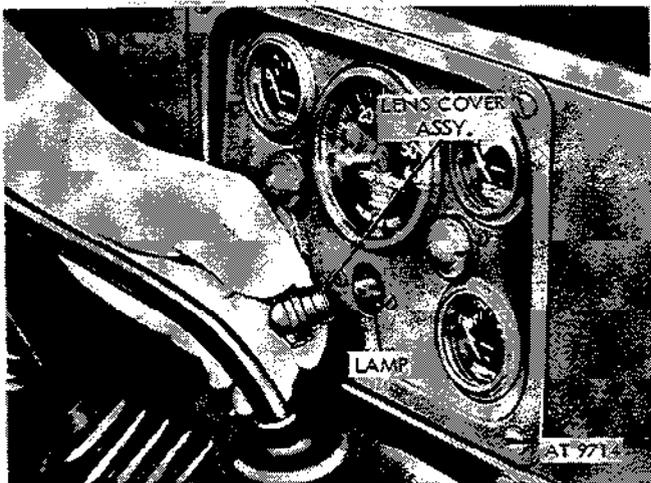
Unscrew lens. Push lamp in and turn to left to remove.
